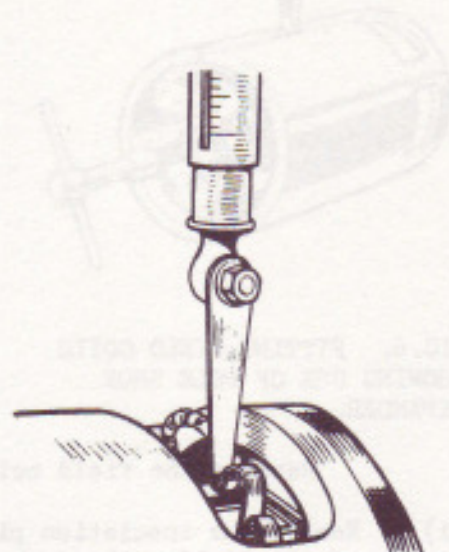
SHOWING CHECKING OF BRUSH SPRING TENSION.
